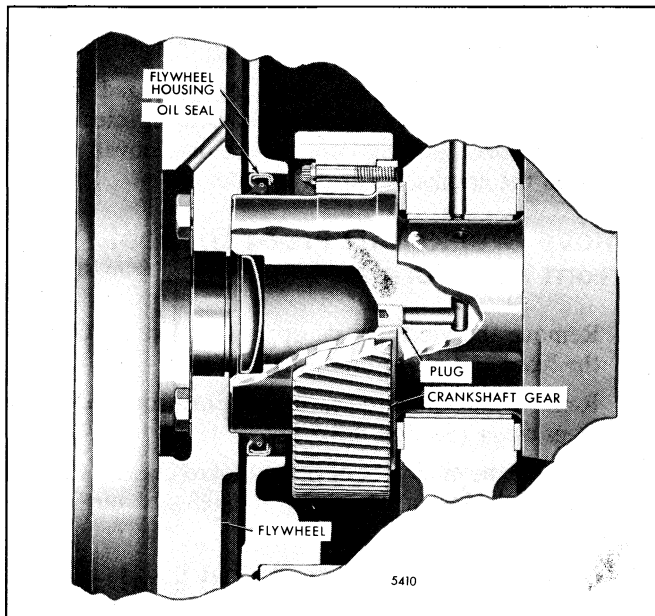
Crankshaft Rear Oil Seal - Fonnor
